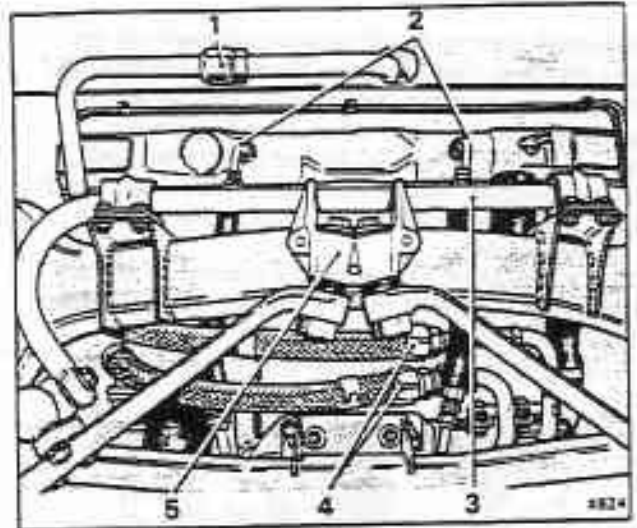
Engine and transmission cooler pipes (Mulsanne Turbo cars)
